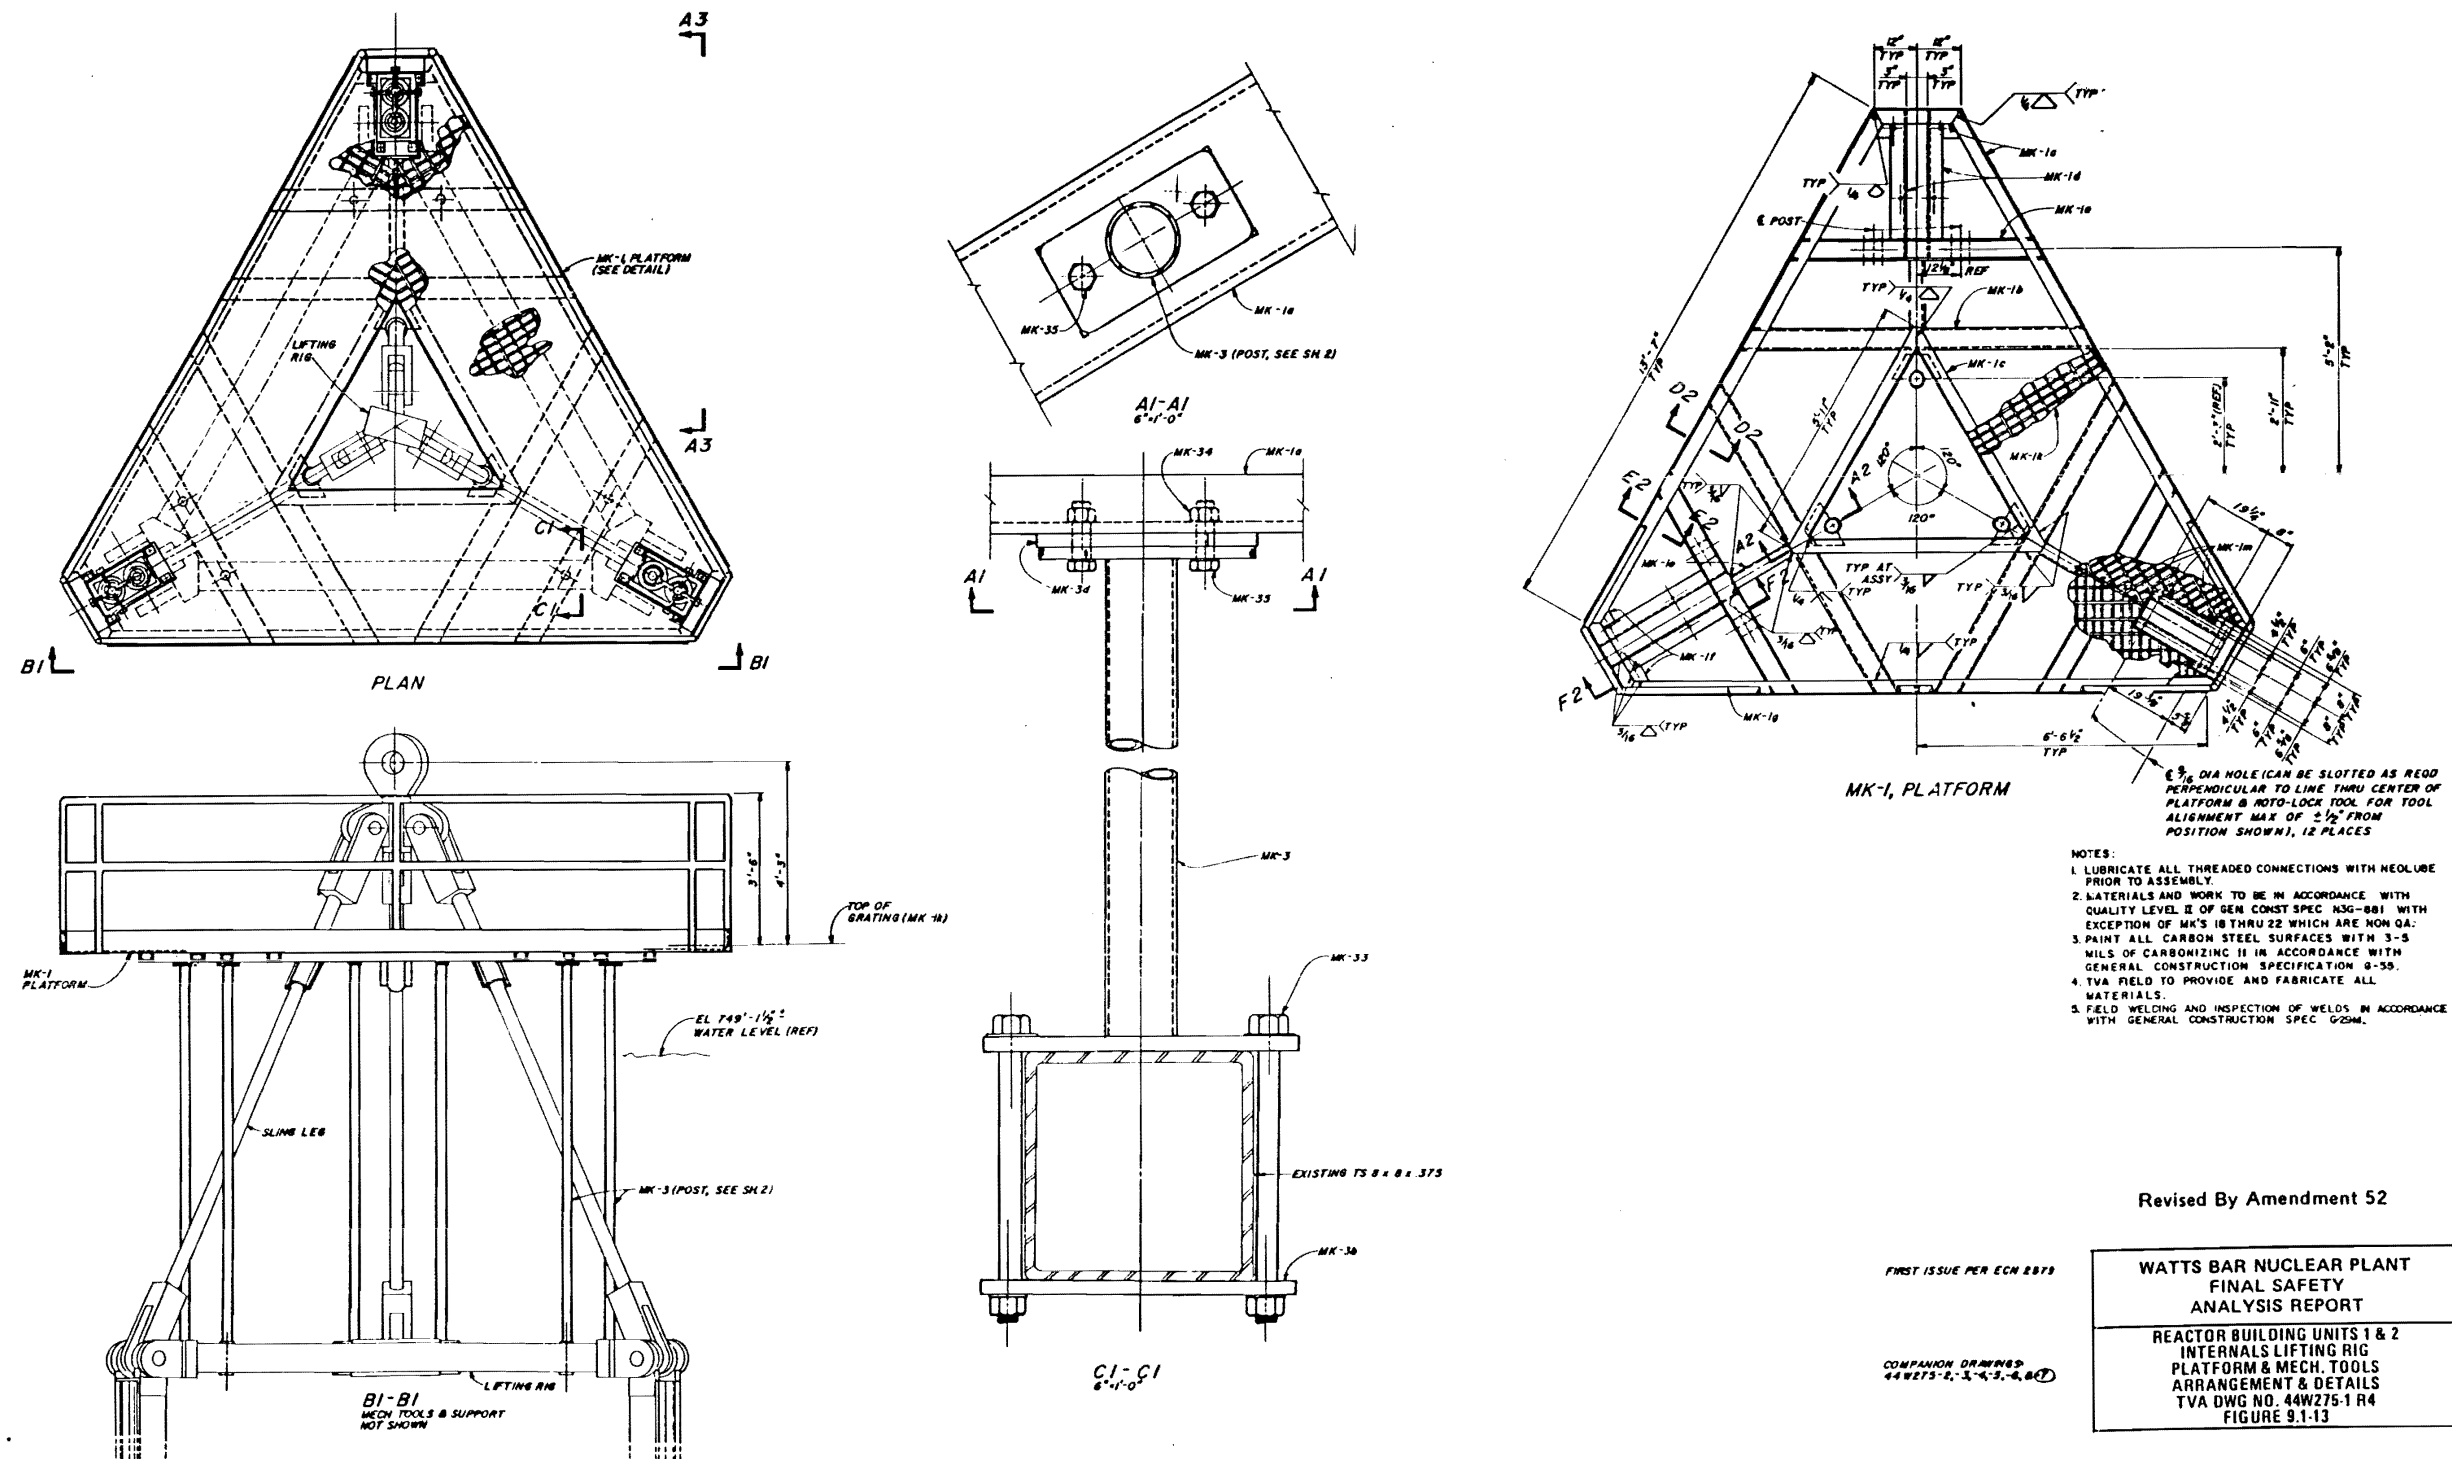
Reactor Building Internals Lifting Rig Platform and Mech. Tools Arrangement and Details
